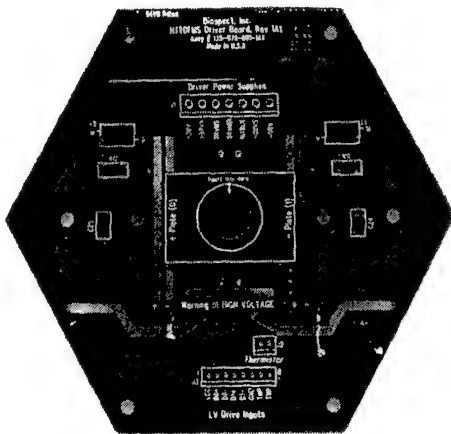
Custom BNG/driver board without BNG. This device is mounted in vacuum with the BNG in order to eliminate ringing caused by the transmission line.
